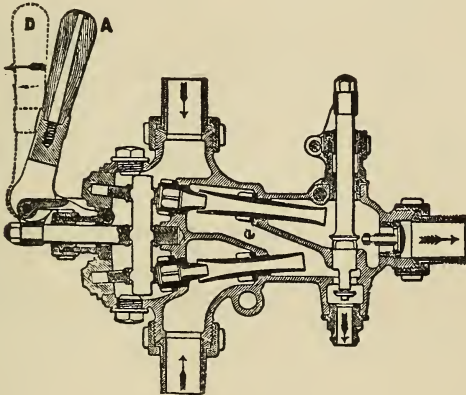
Sectional view of the Korting double tube injector. The lower tube is for lifting the water to the injector, and the upper tube for forcing the water in the boiler. A is the closed position of the operating handle. To start the injector, the handle is moved slowly in the direction D.
